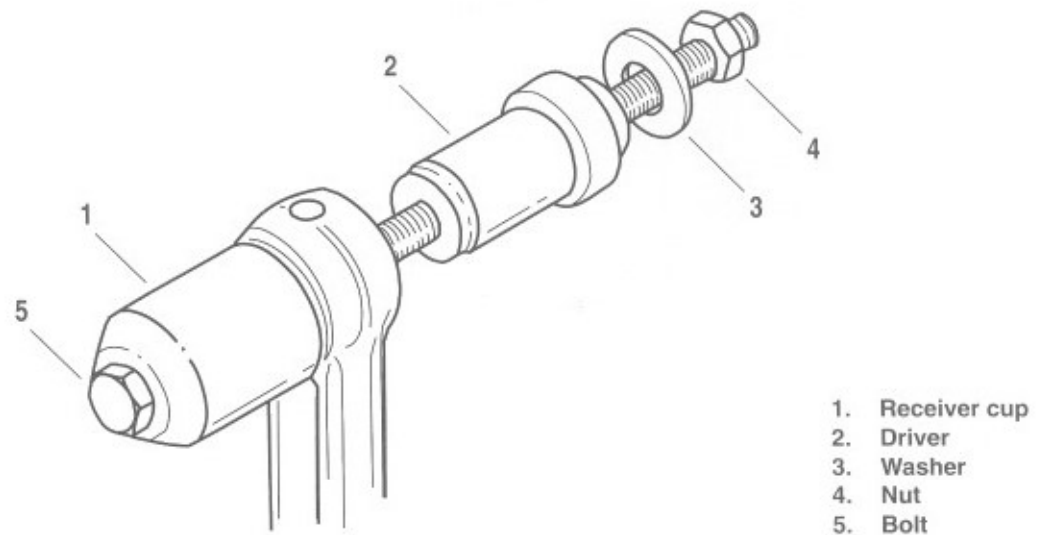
Piston Pin Bushing Tool Assembly for Bushing Removal
